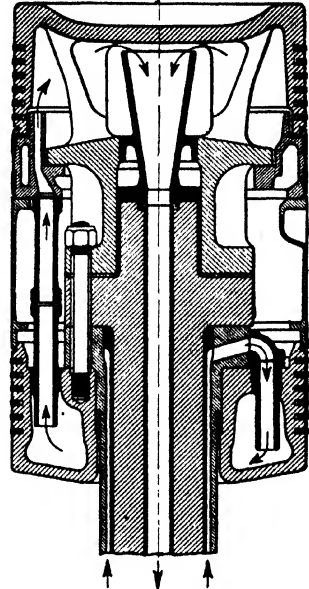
Section through Sulzer double-acting piston showing construction and cooling water flow.
